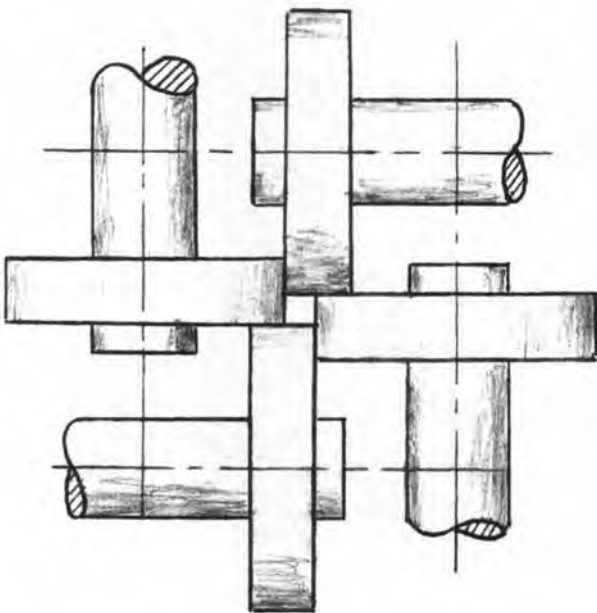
G4 Turk's-head rolling of wire into a rectangular cross-section. By moving the rollers to slightly different positions, rectangular wire can be rolled. Contoured rollers can be used to make wire of other cross-sections.
